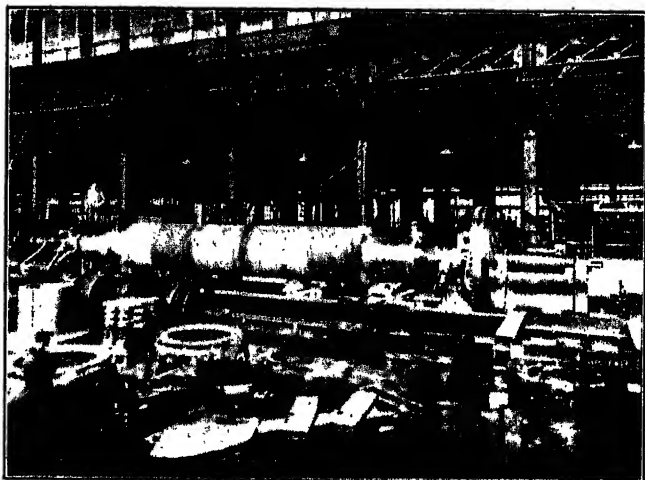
240,000 LB. SINGLE FORGING FOR THE 115,000-Kw. GENERATOR ROTOR BEING BUILT BY THE ALLIS CHALMERS Co.
